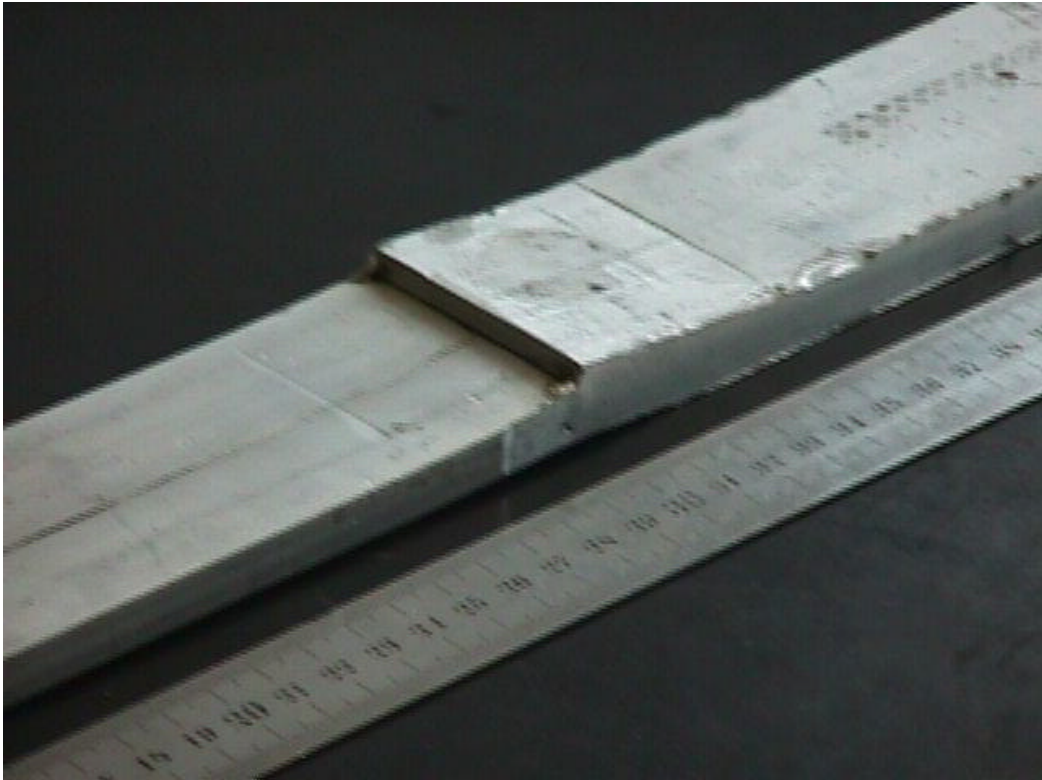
After the welding, the test joint is machined so as to reach its final dimensions.
